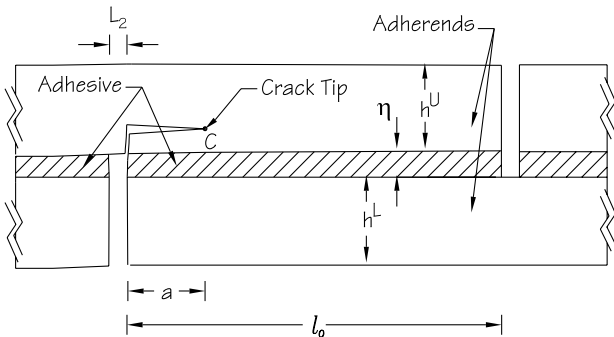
ASTM D3165 specimen with initial crack of length a .
